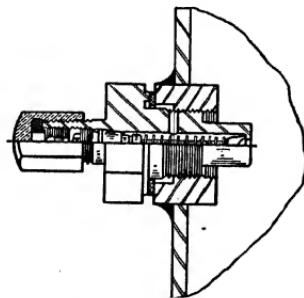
Construction of filler plug *A* (Fig. 4) and valve.
